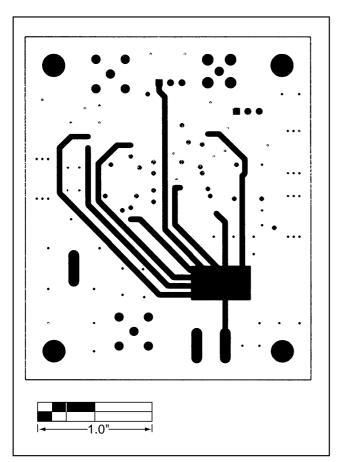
MAX2102 EV Kit PC Board Layout—Power Layer
